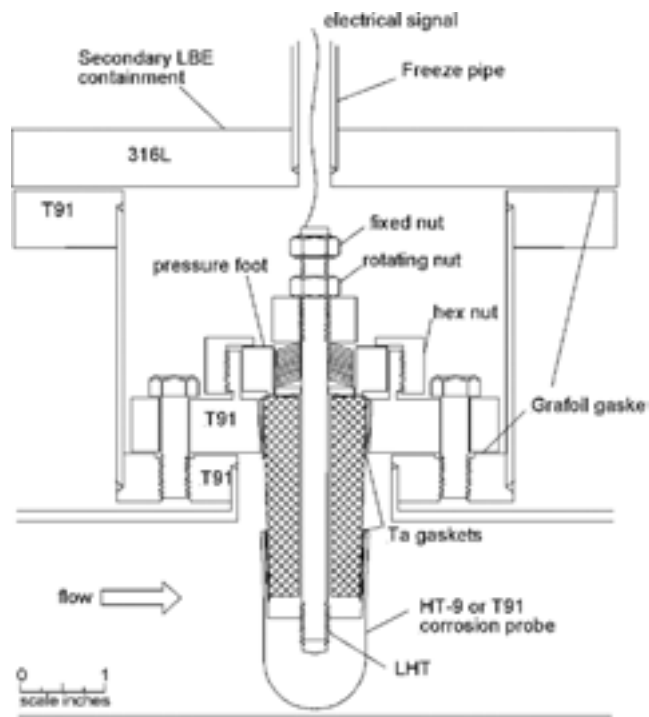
Cross section through a Ta-sealed press-fit assembly with a 3° taper for upper and lower joints.
